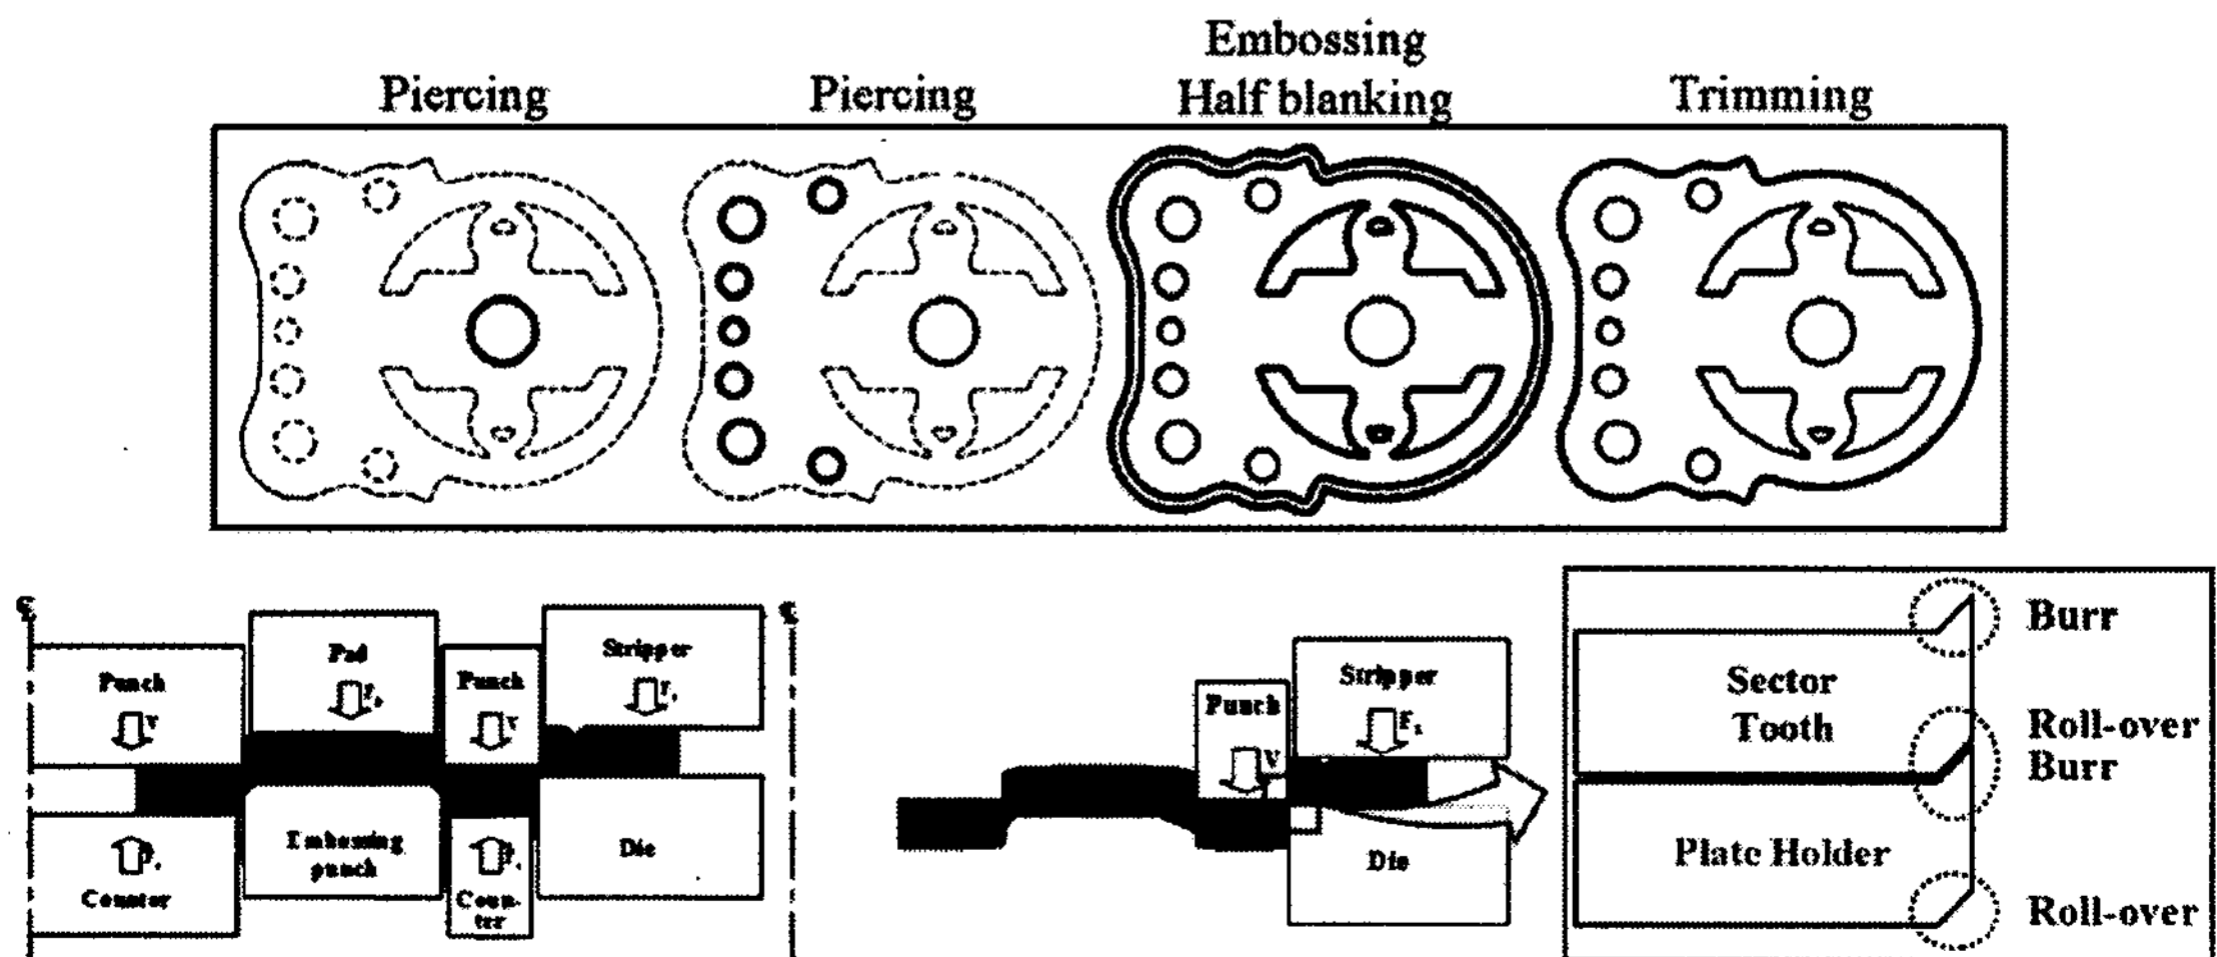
Schematic drawing of process layout and assembly of plate holder with sector tooth in improved FCF process
